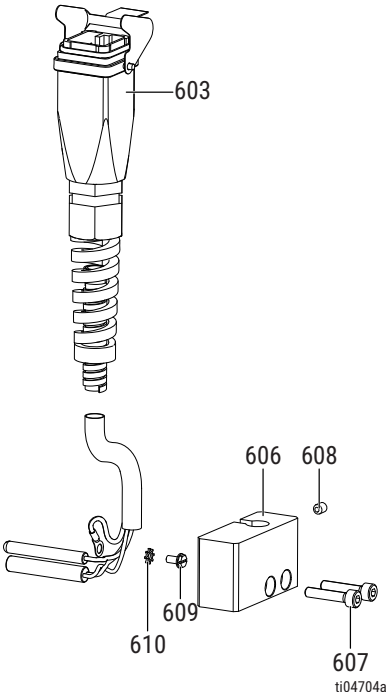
Heater Assembly (for 0 mm Outlet Block)
